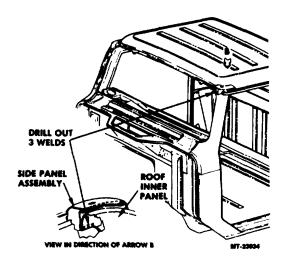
Side Panel to Roof Outer and Inner Panel Spot Welds (Outer Roof Panel Not Shown)
